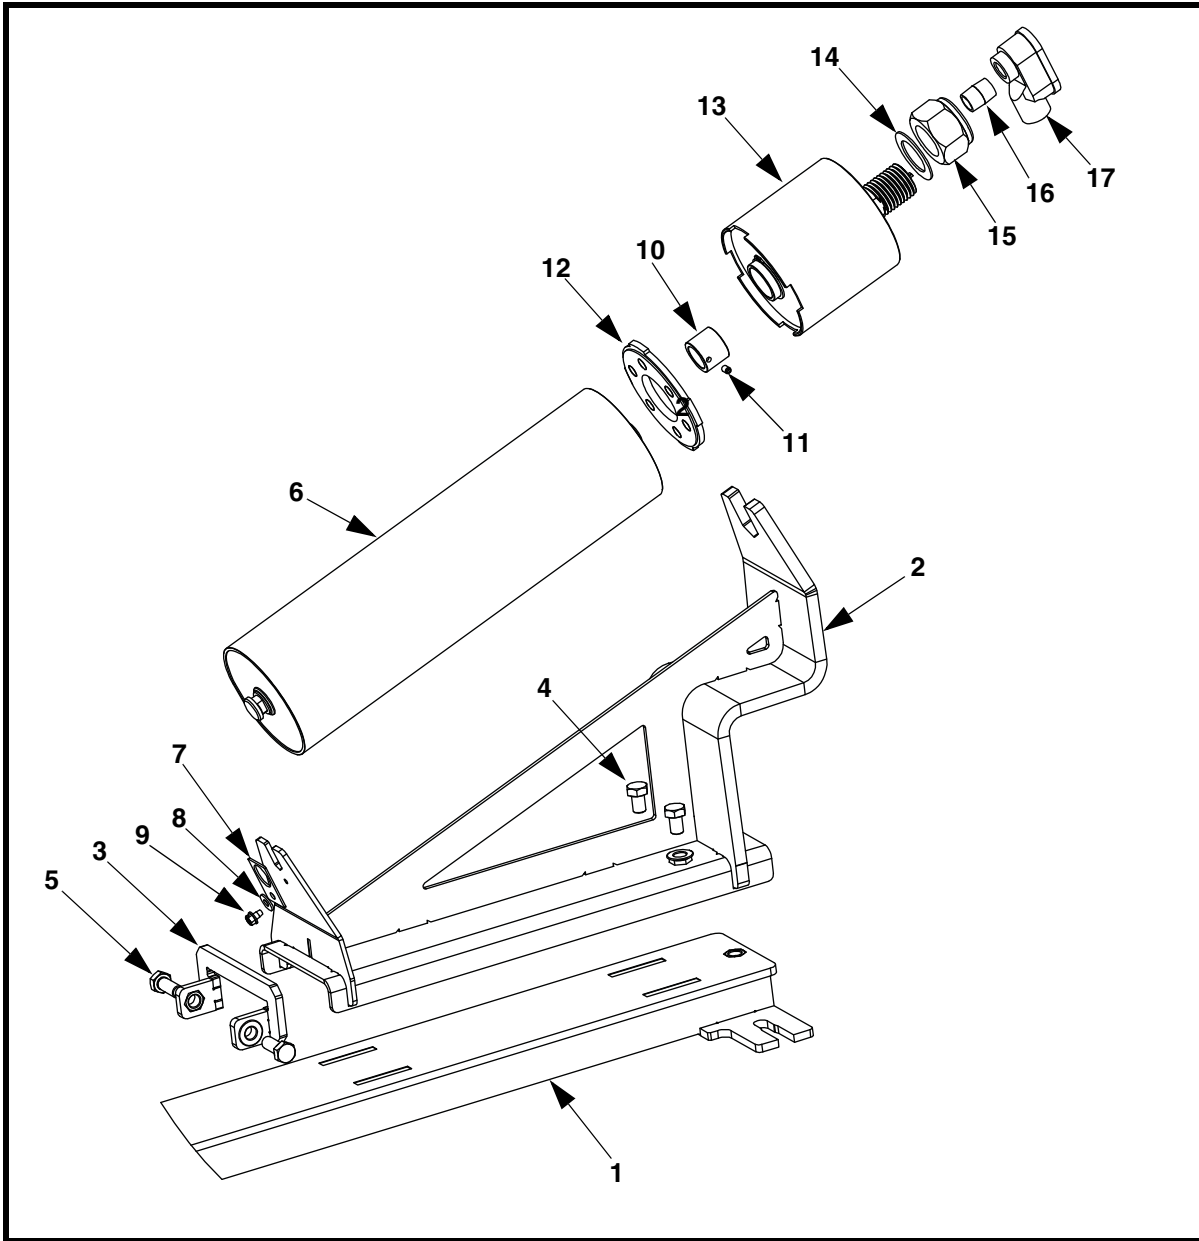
Martin® Roll Generator Assembly, P/N RGTMDXP-XXXX1XX
